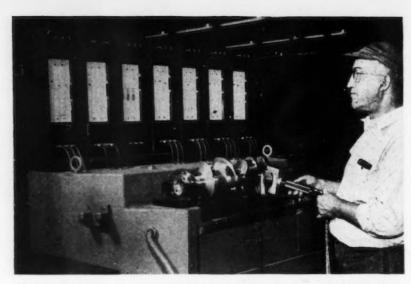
Crankshafts are air gageg on a semi-automatic basis in this machine. All bearing and pin diameters are checked at three points and the length of the rear main bearing is also measured. These dimensions are held within ± 0.001 -in.
